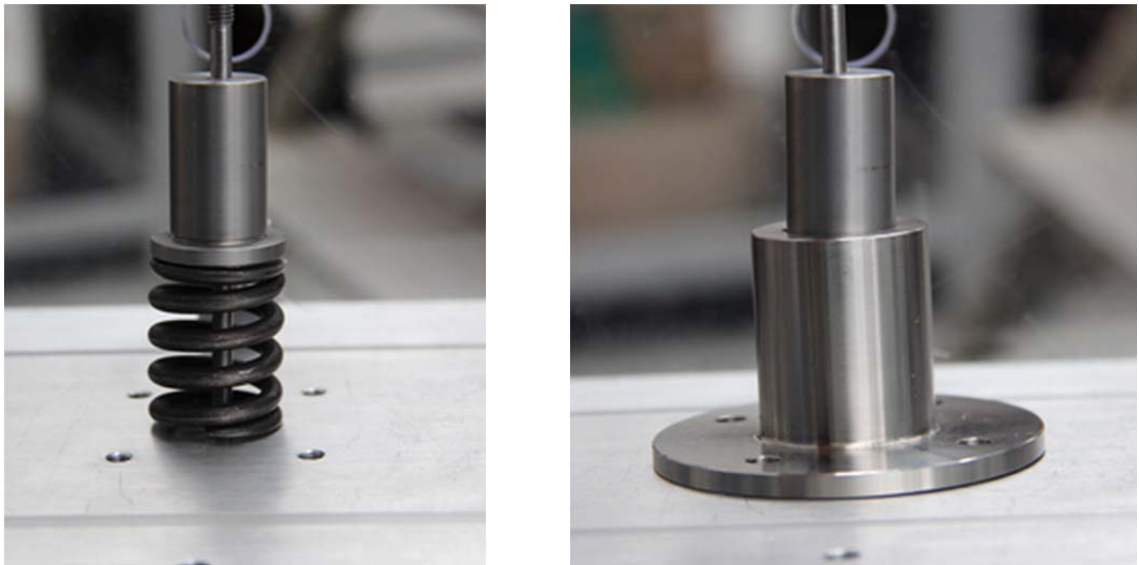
Mounting of compression spring (left), spring forcer and safety spring bushing (right)
